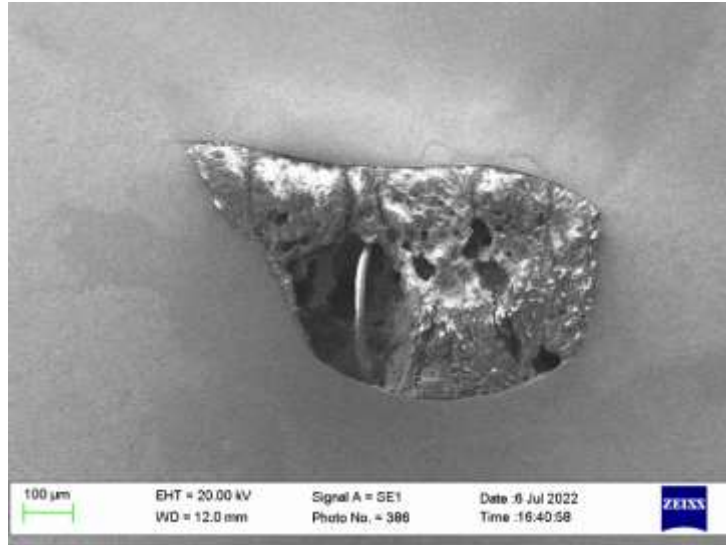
Welding defects of MMA sample in the fusion zone
